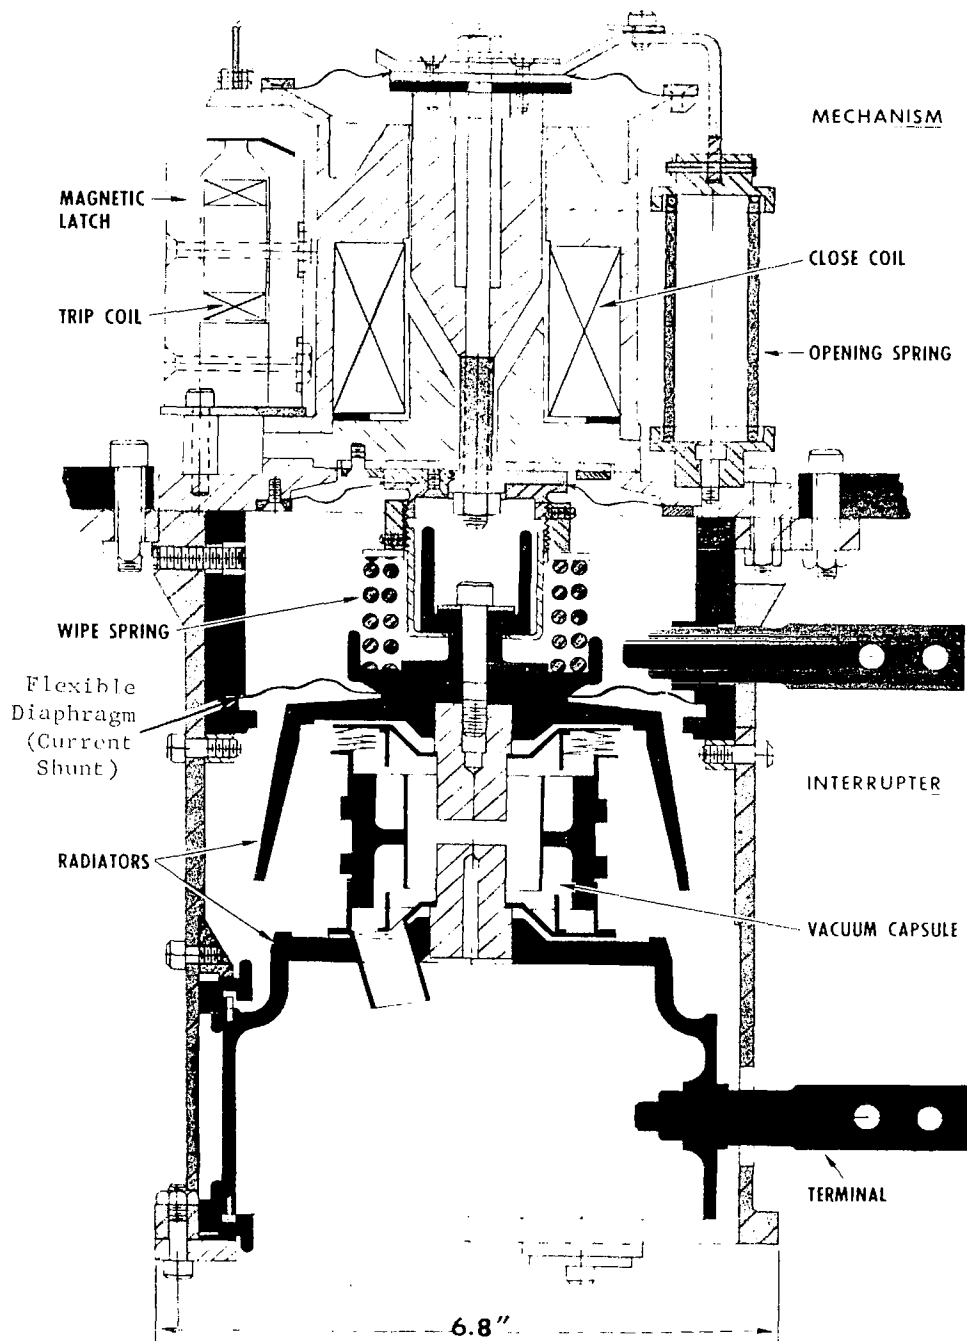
Cross Section Layout of Modified AC Breaker with Flux Shift Latch Mechanism.
